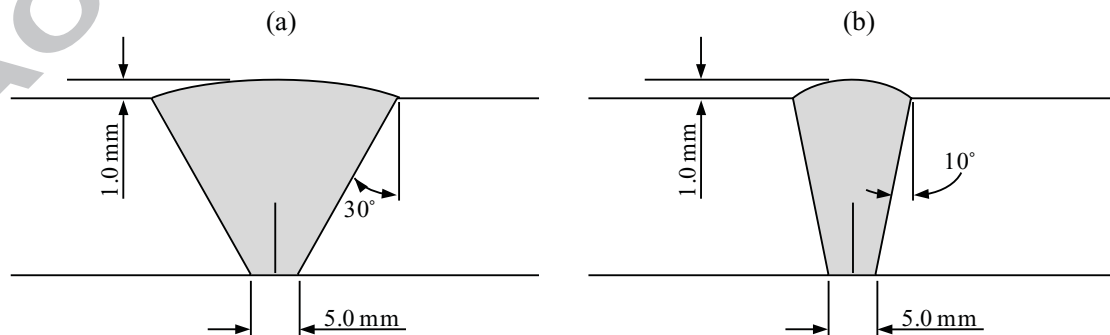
Investigated weld bevel geometries: wide V-shaped bevel (a) and narrow gap bevel (b)
